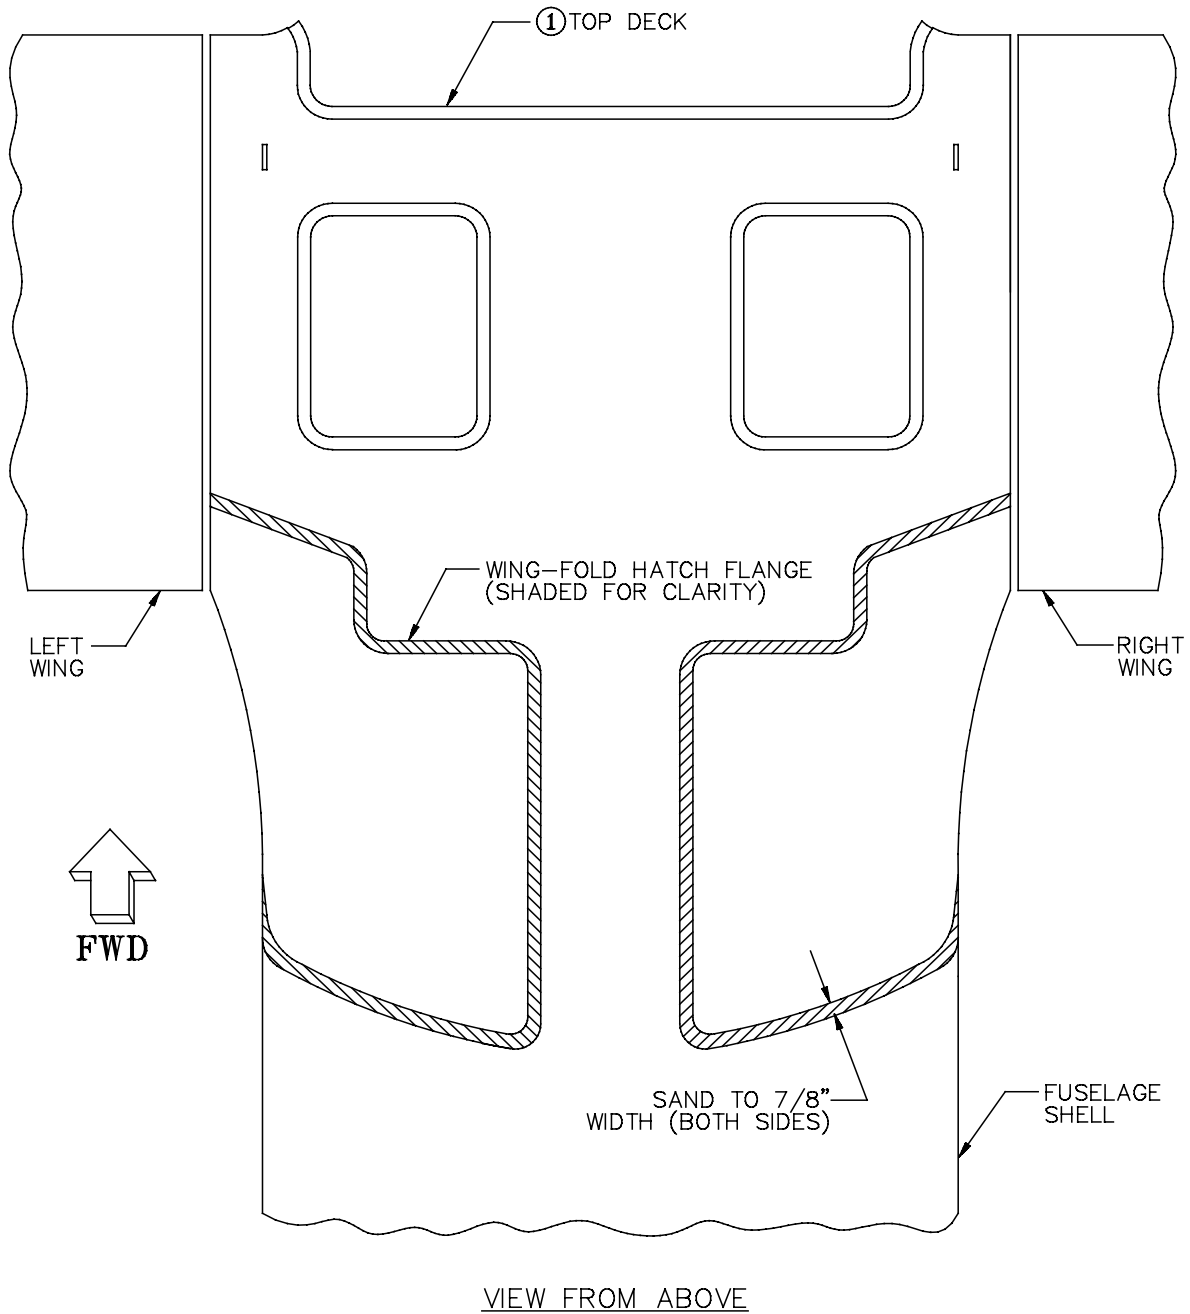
Trimming the Wing-Fold Hatch Mounting Flange
